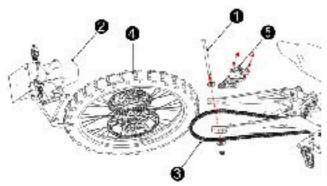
11.22 Disassemble rear wheel (see Fig 51) Disassemble rear wheel according to the following steps:
